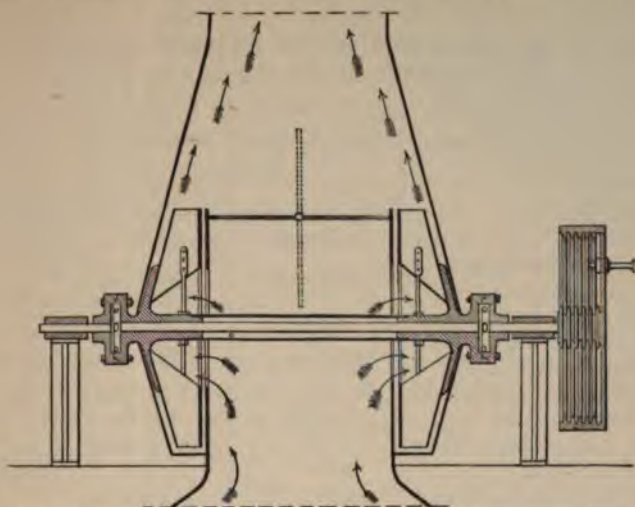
Induced Draught by an Exhausting Fan, showing ordinary draught cut off by valve damper.
